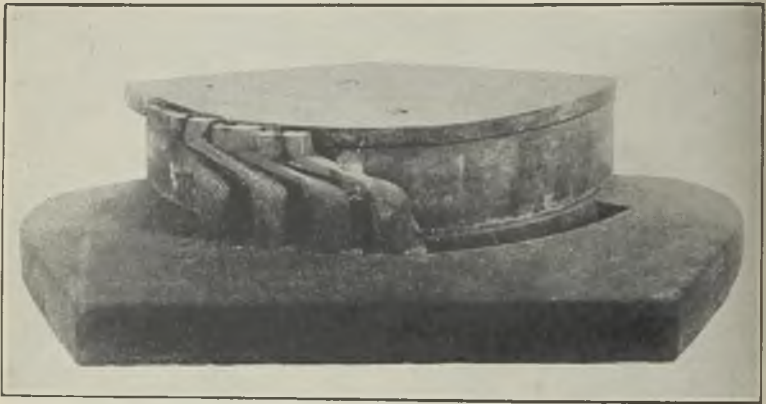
NOZZLE CORES PARTLY ASSEMBLED.
